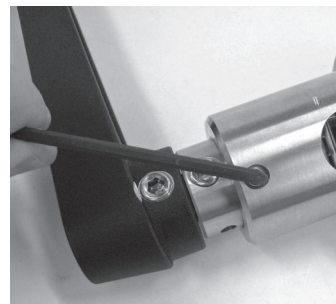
Loosening the 1/4 in. set screw (second screw is on opposite side of housing)
